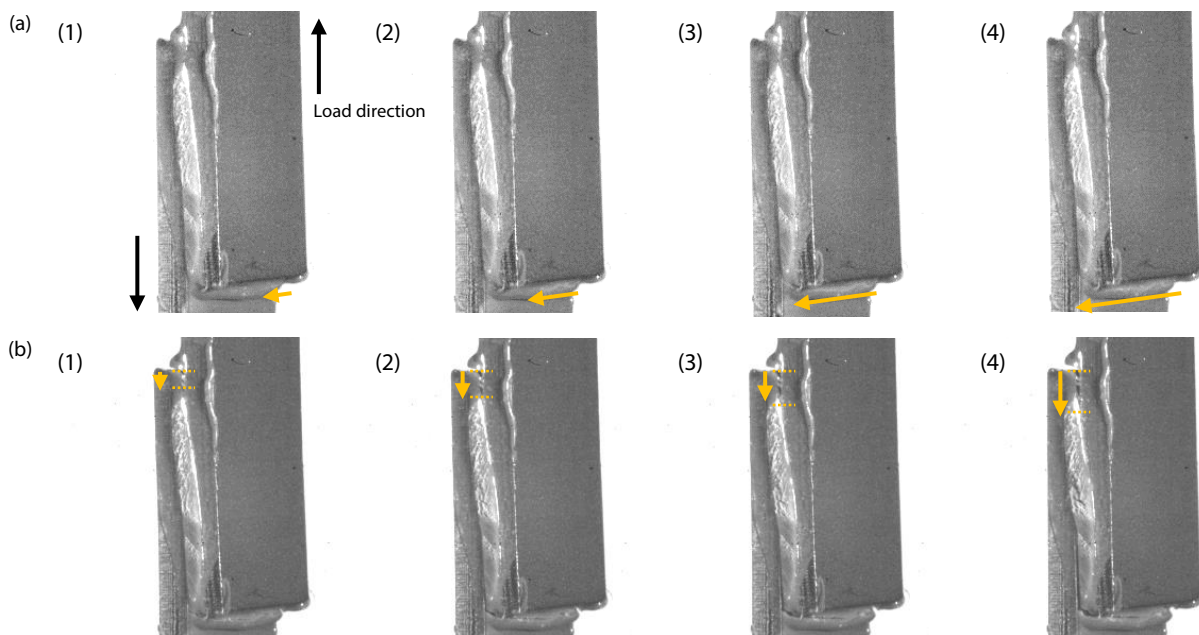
Shear Fracture of TB2049 at 2 m/s
